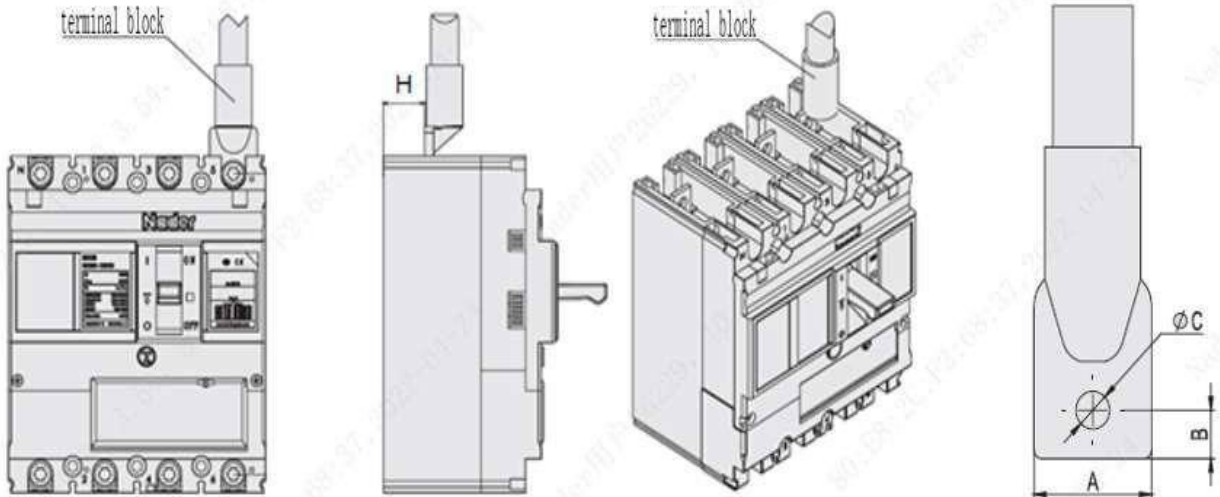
Connection diagram of copper bar in front of board or copper cable with wiring terminal
